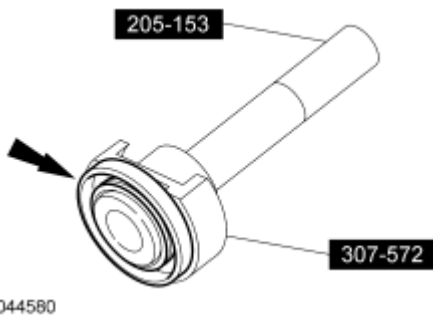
Identifying Special Tools (205-153, 307-572) And Differential Fluid Seal
